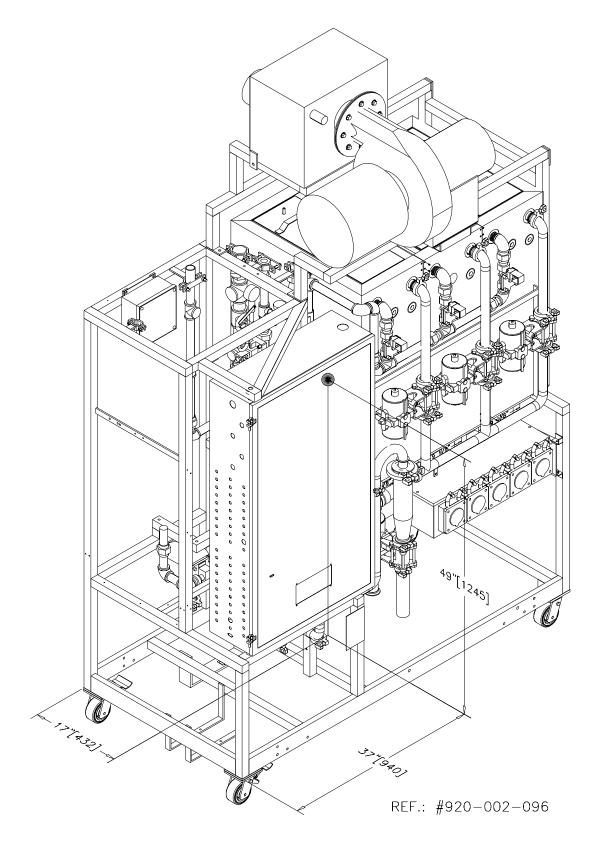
Mobile Mechanical Core - Center of Gravity
